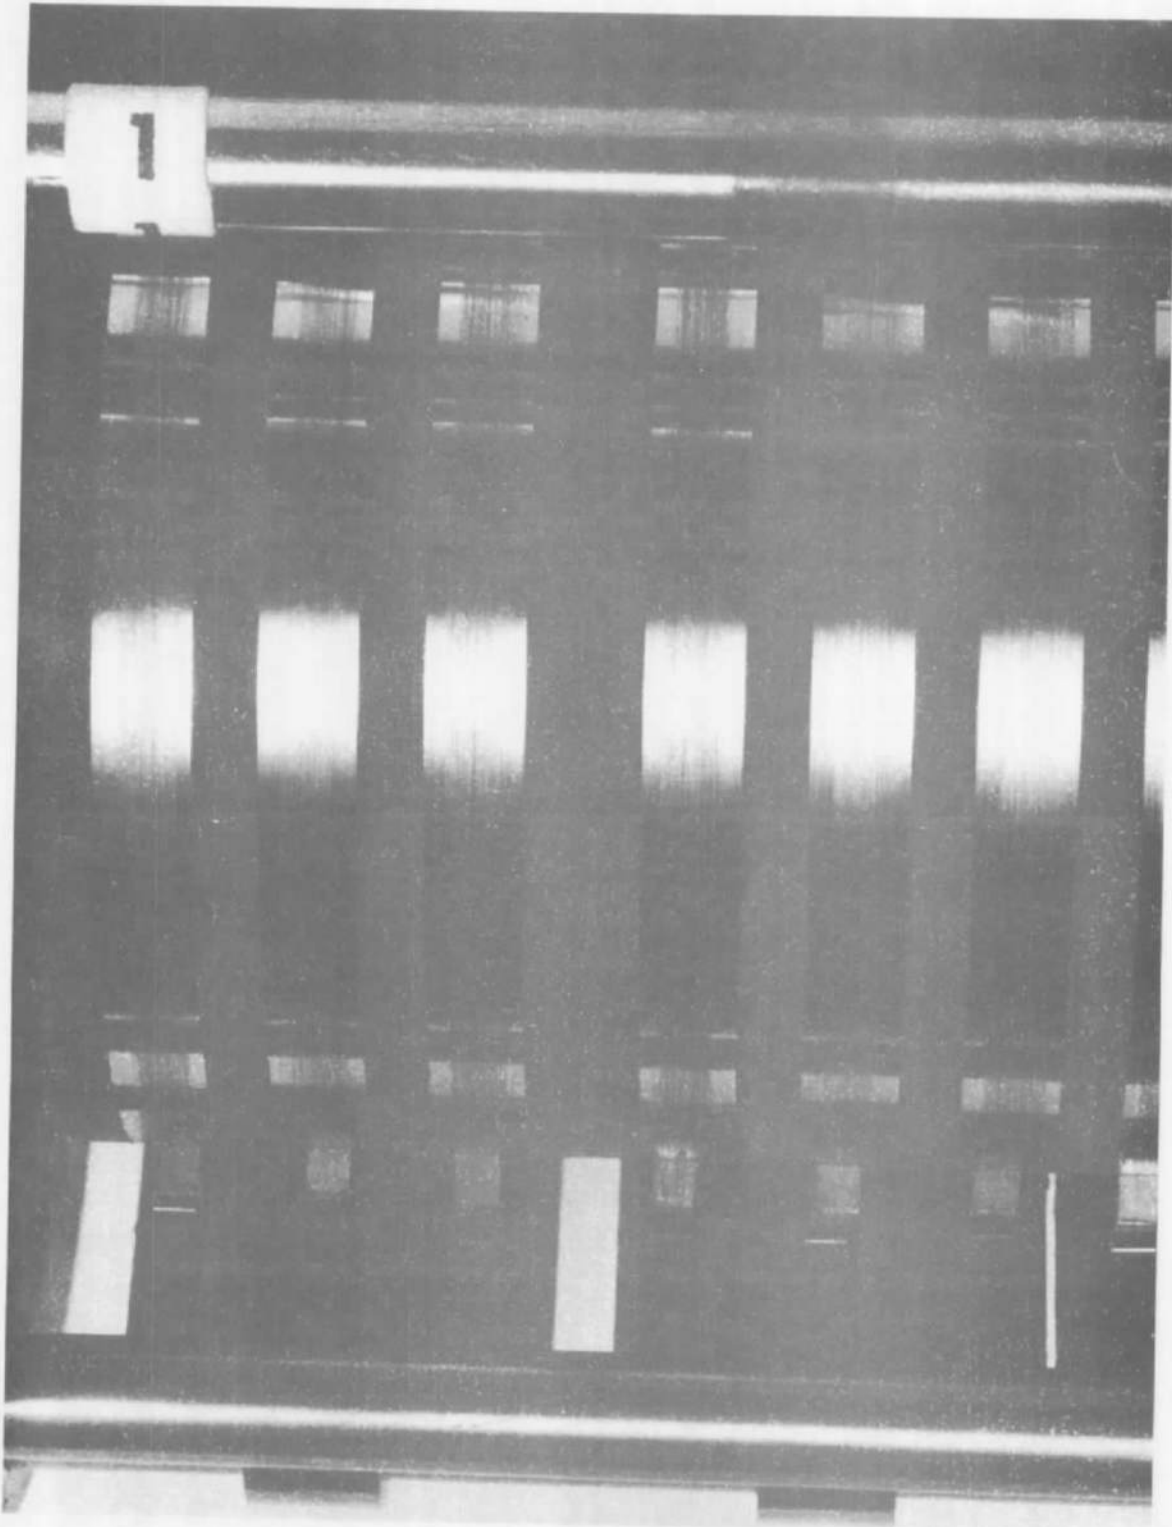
Detail at Ring 1 Through 6 of Assembly After Testing
